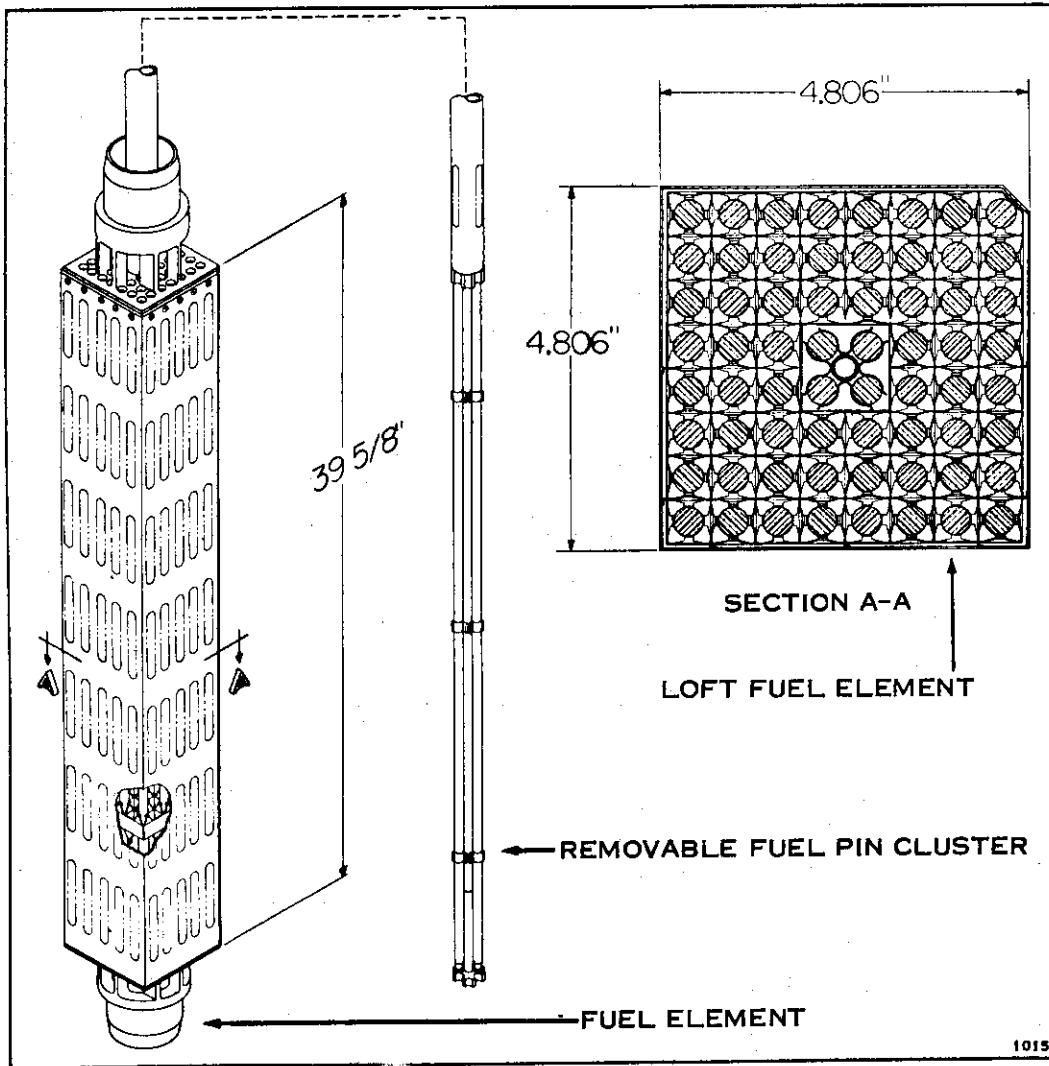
LOFT FUEL ELEMENT ASSEMBLY
